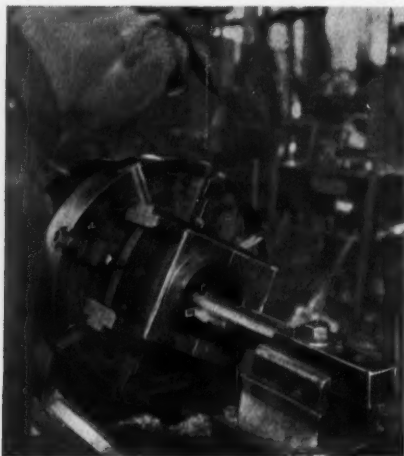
The front side rod brasses are bored out in the lathe, using a special fixture.
